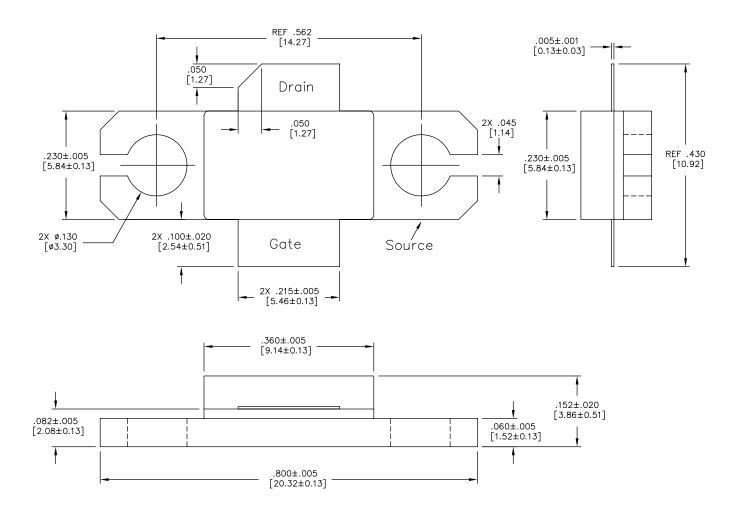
AC360B-2 Metal-Ceramic Package Dimensions and Pinout (all dimensions are in inches [mm])
